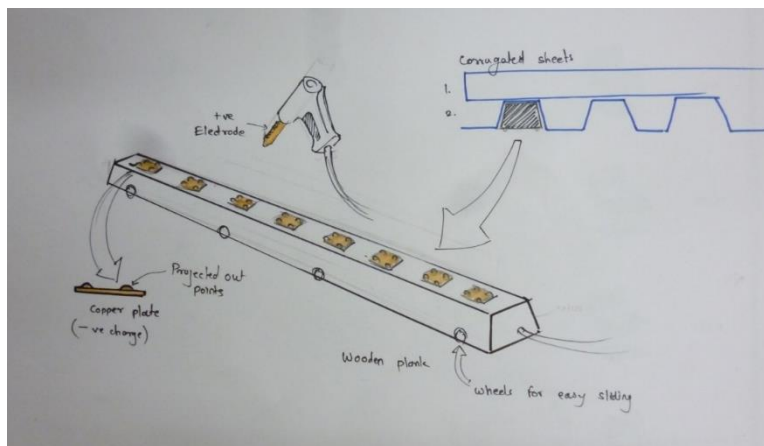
Spot Welding Machine Setup for corrugated sheet joining
